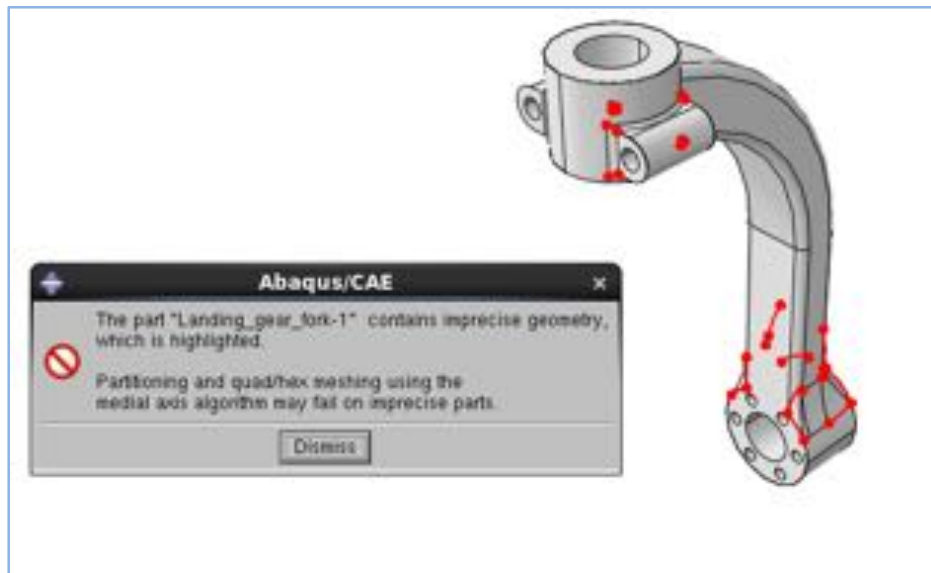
CAD engineering drawing of simplified landing gear assembly.
